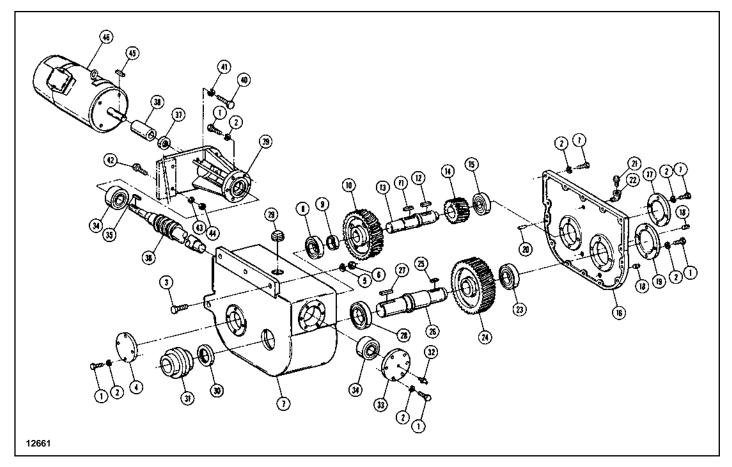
Traverse Motor and Gear Case for DMR-5
